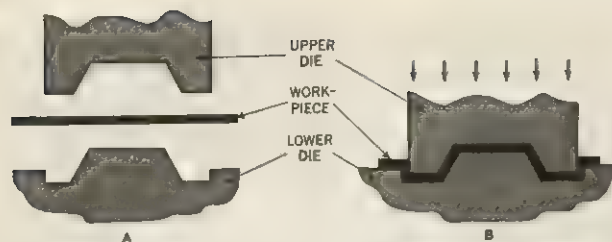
BASIC MACHINE-TOOL OPERATIONS: PRESSING: (A) WORKPIECE IN POSITION; (B) DIES CLOSED
